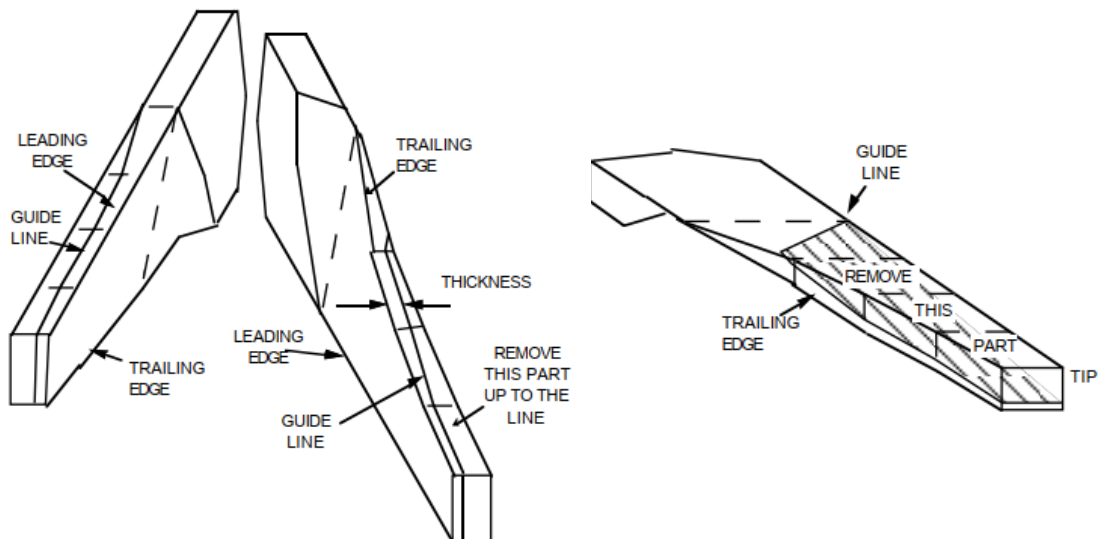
Workpiece marks to achieve the blade thickness [35].
